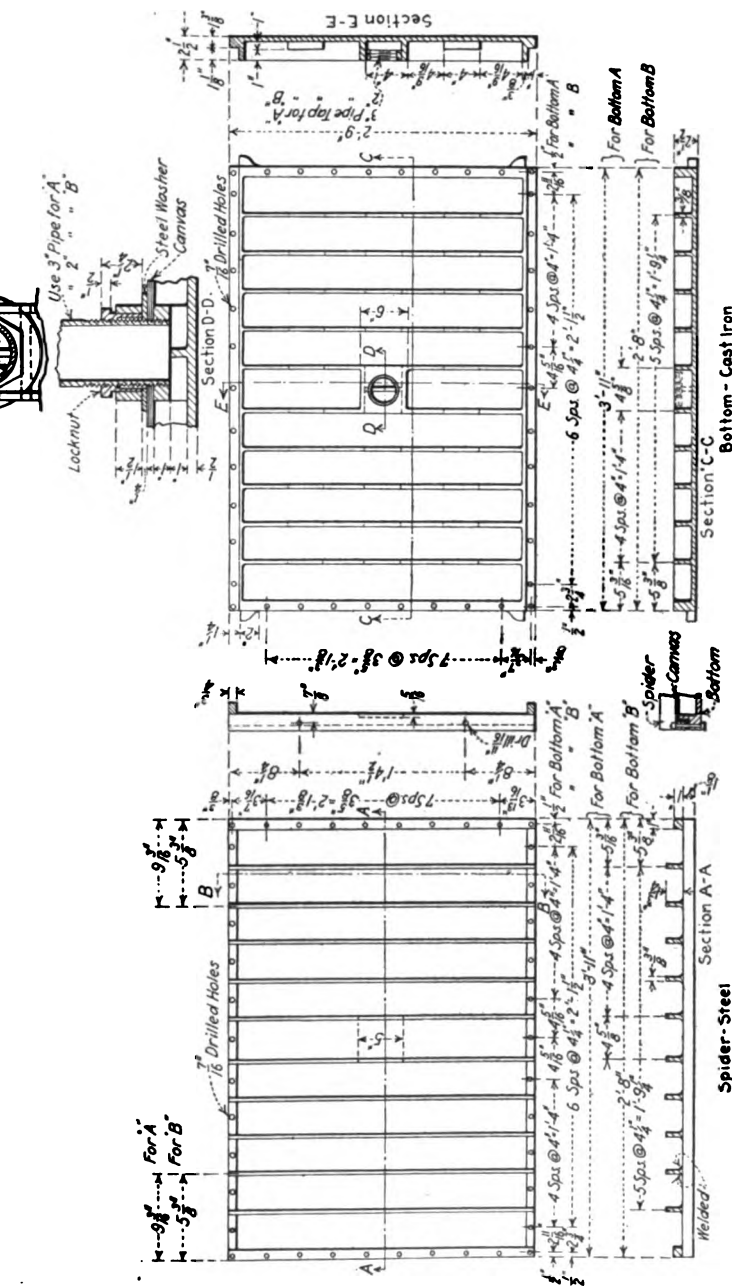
INSPIRATION FLOTATION MACHINE BOTTOMS.
